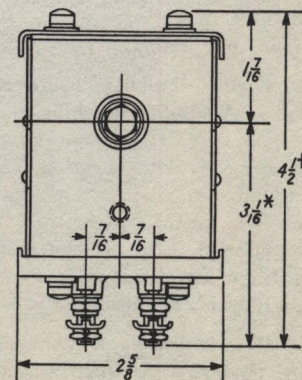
REAR VIEW AND DIMENSIONS OF TYPE W INSTRUMENT AND CONTROL SWITCHES
